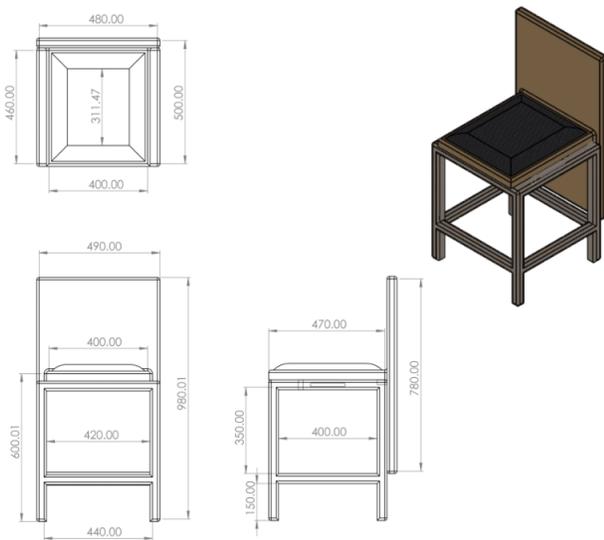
Project 2 sketching (2D detailed front view, side view, and top view) and 3D model view (assembly from parts).
